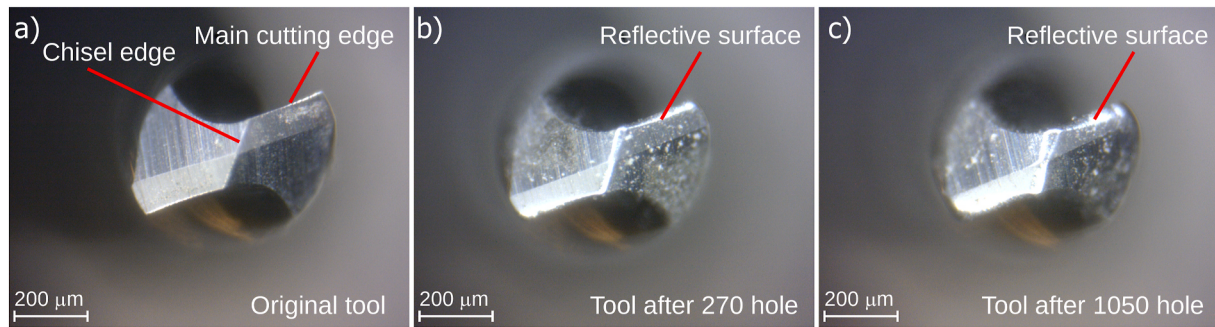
Progress of tool wear of the applied micro-drill at feed of 24 μm , i.e., a) the starting tool geometry, b) tool geometry after 270 holes were drilled, and c) tool geometry after 1050 holes were drilled.
